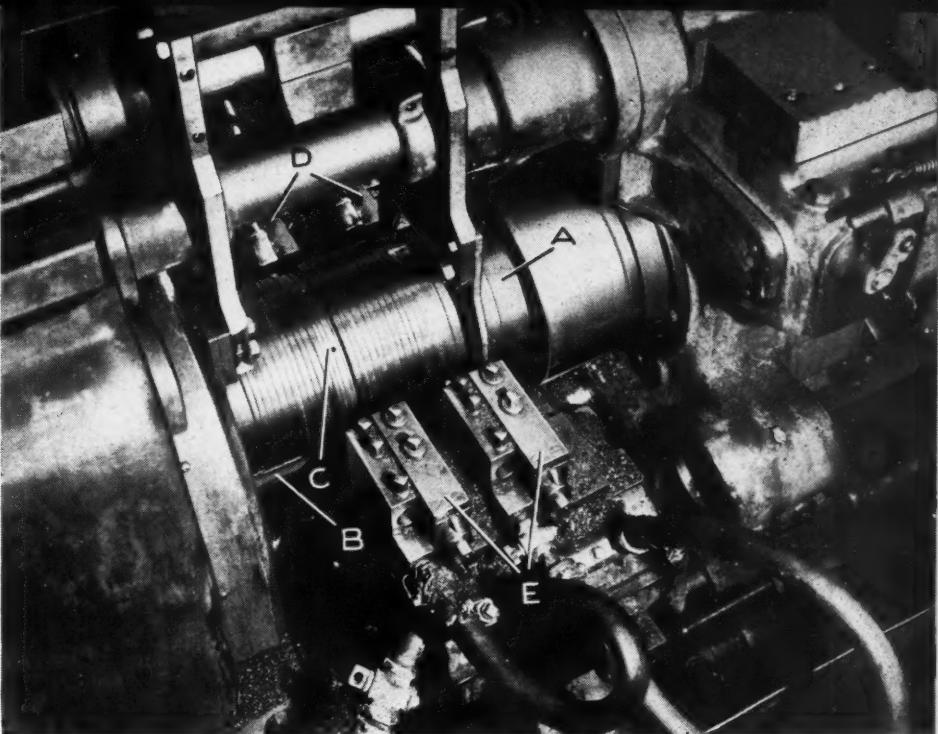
In the machine shown in the heading illustration, carbide parting tools (A) are used for cutting off piston-rings one at a time through a stripper plate (B). A carbide boring tool is shown at (C) and a turning tool at (D)
